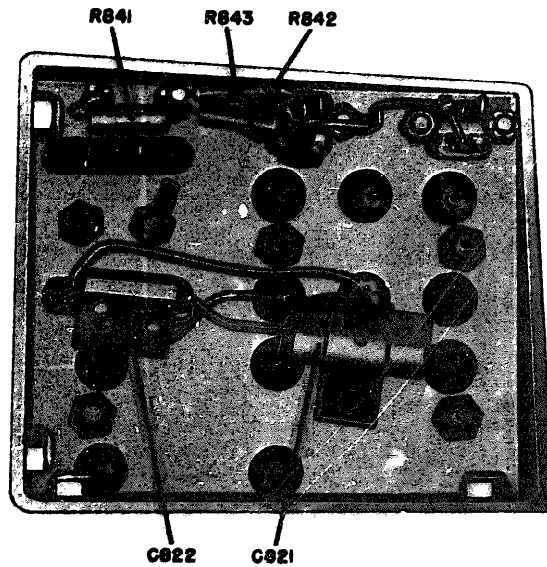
Equalizer bracket assembly, bottom view, circuit element location diagram.
